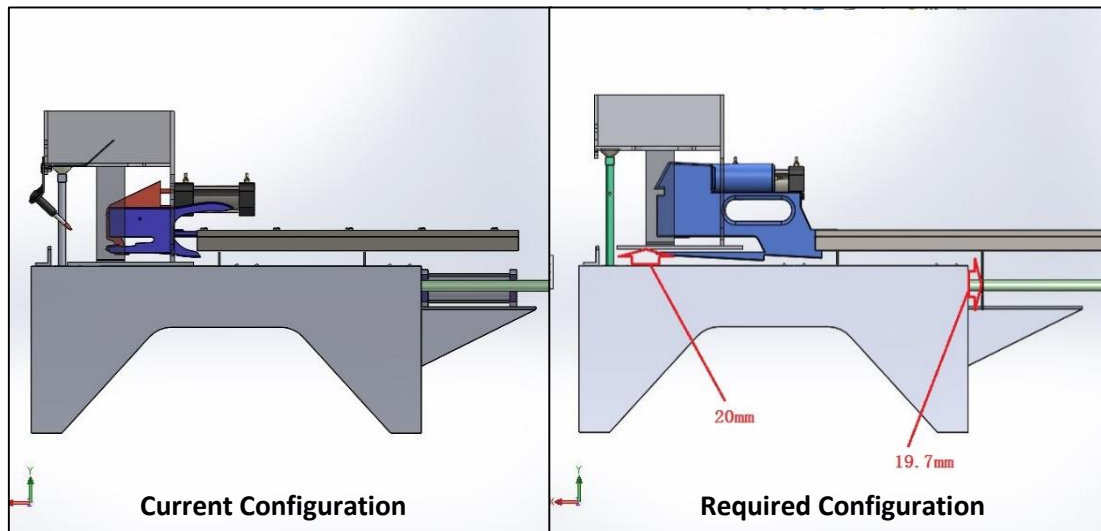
Comparison of current machine dimensions with the dimensions required for the Senior A16/L pneumatic stapler [15].
